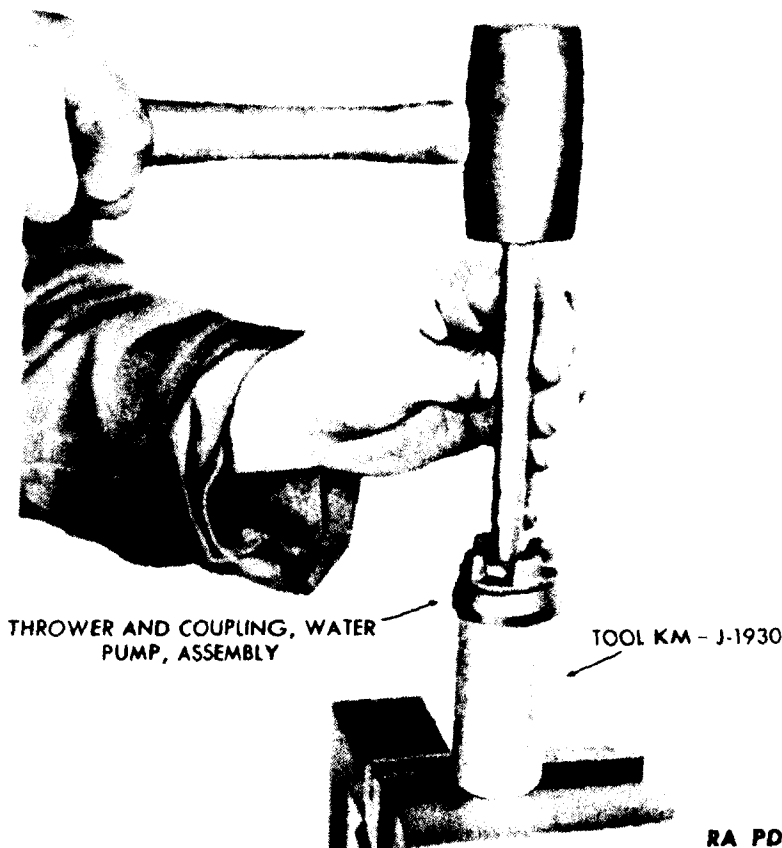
Removing Water Pump Thrower and Coupling Assembly
